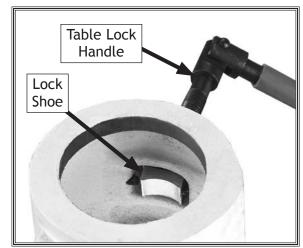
Table lock handle and lock shoe installed in table support bracket.
